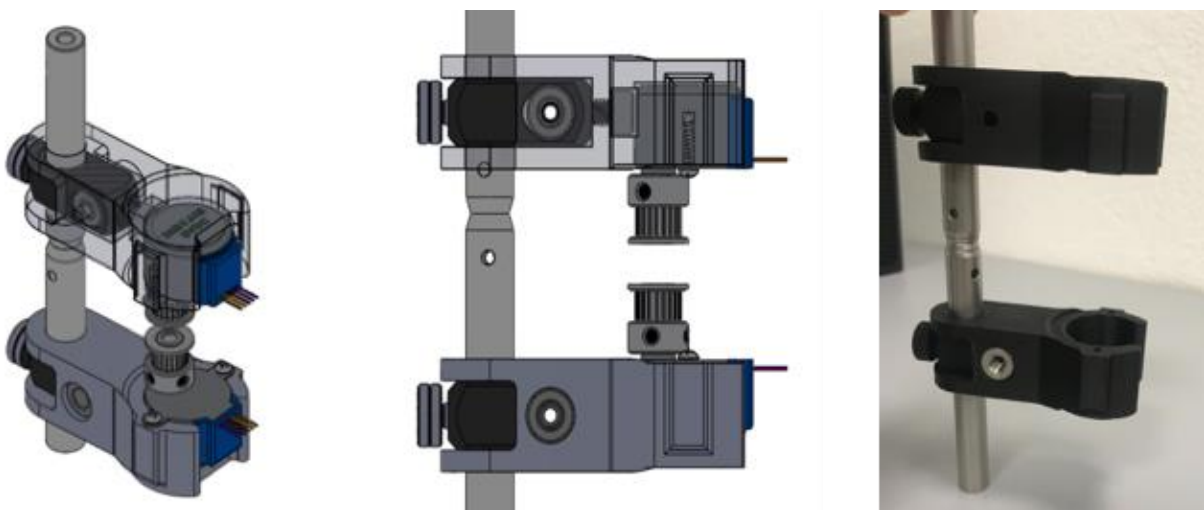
Design III - Motor Housing CAD Models (left and middle) and 3D Printed Models (right)
